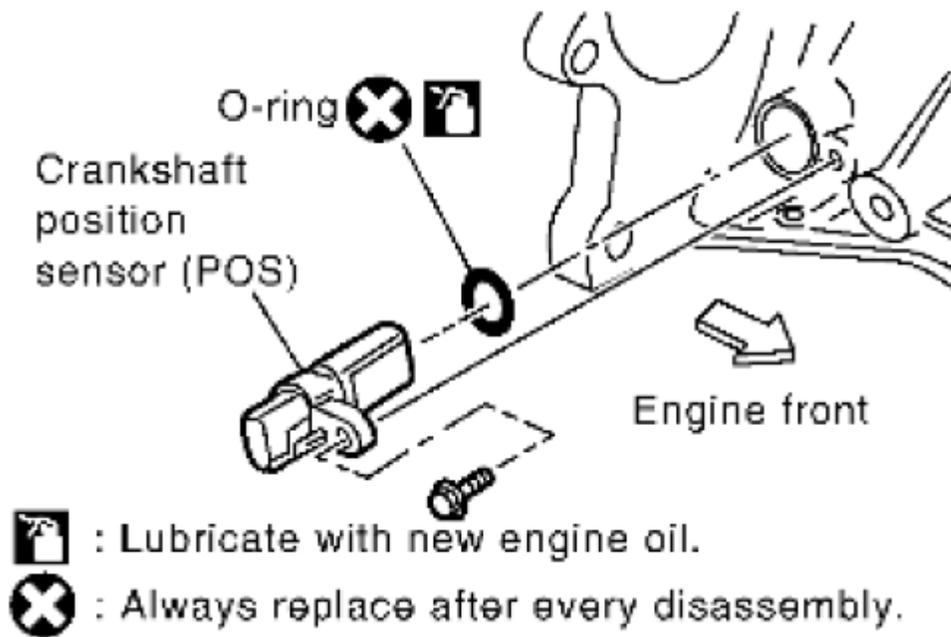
Identifying Crankshaft Position Sensor, O-Ring And Mounting Bolt
